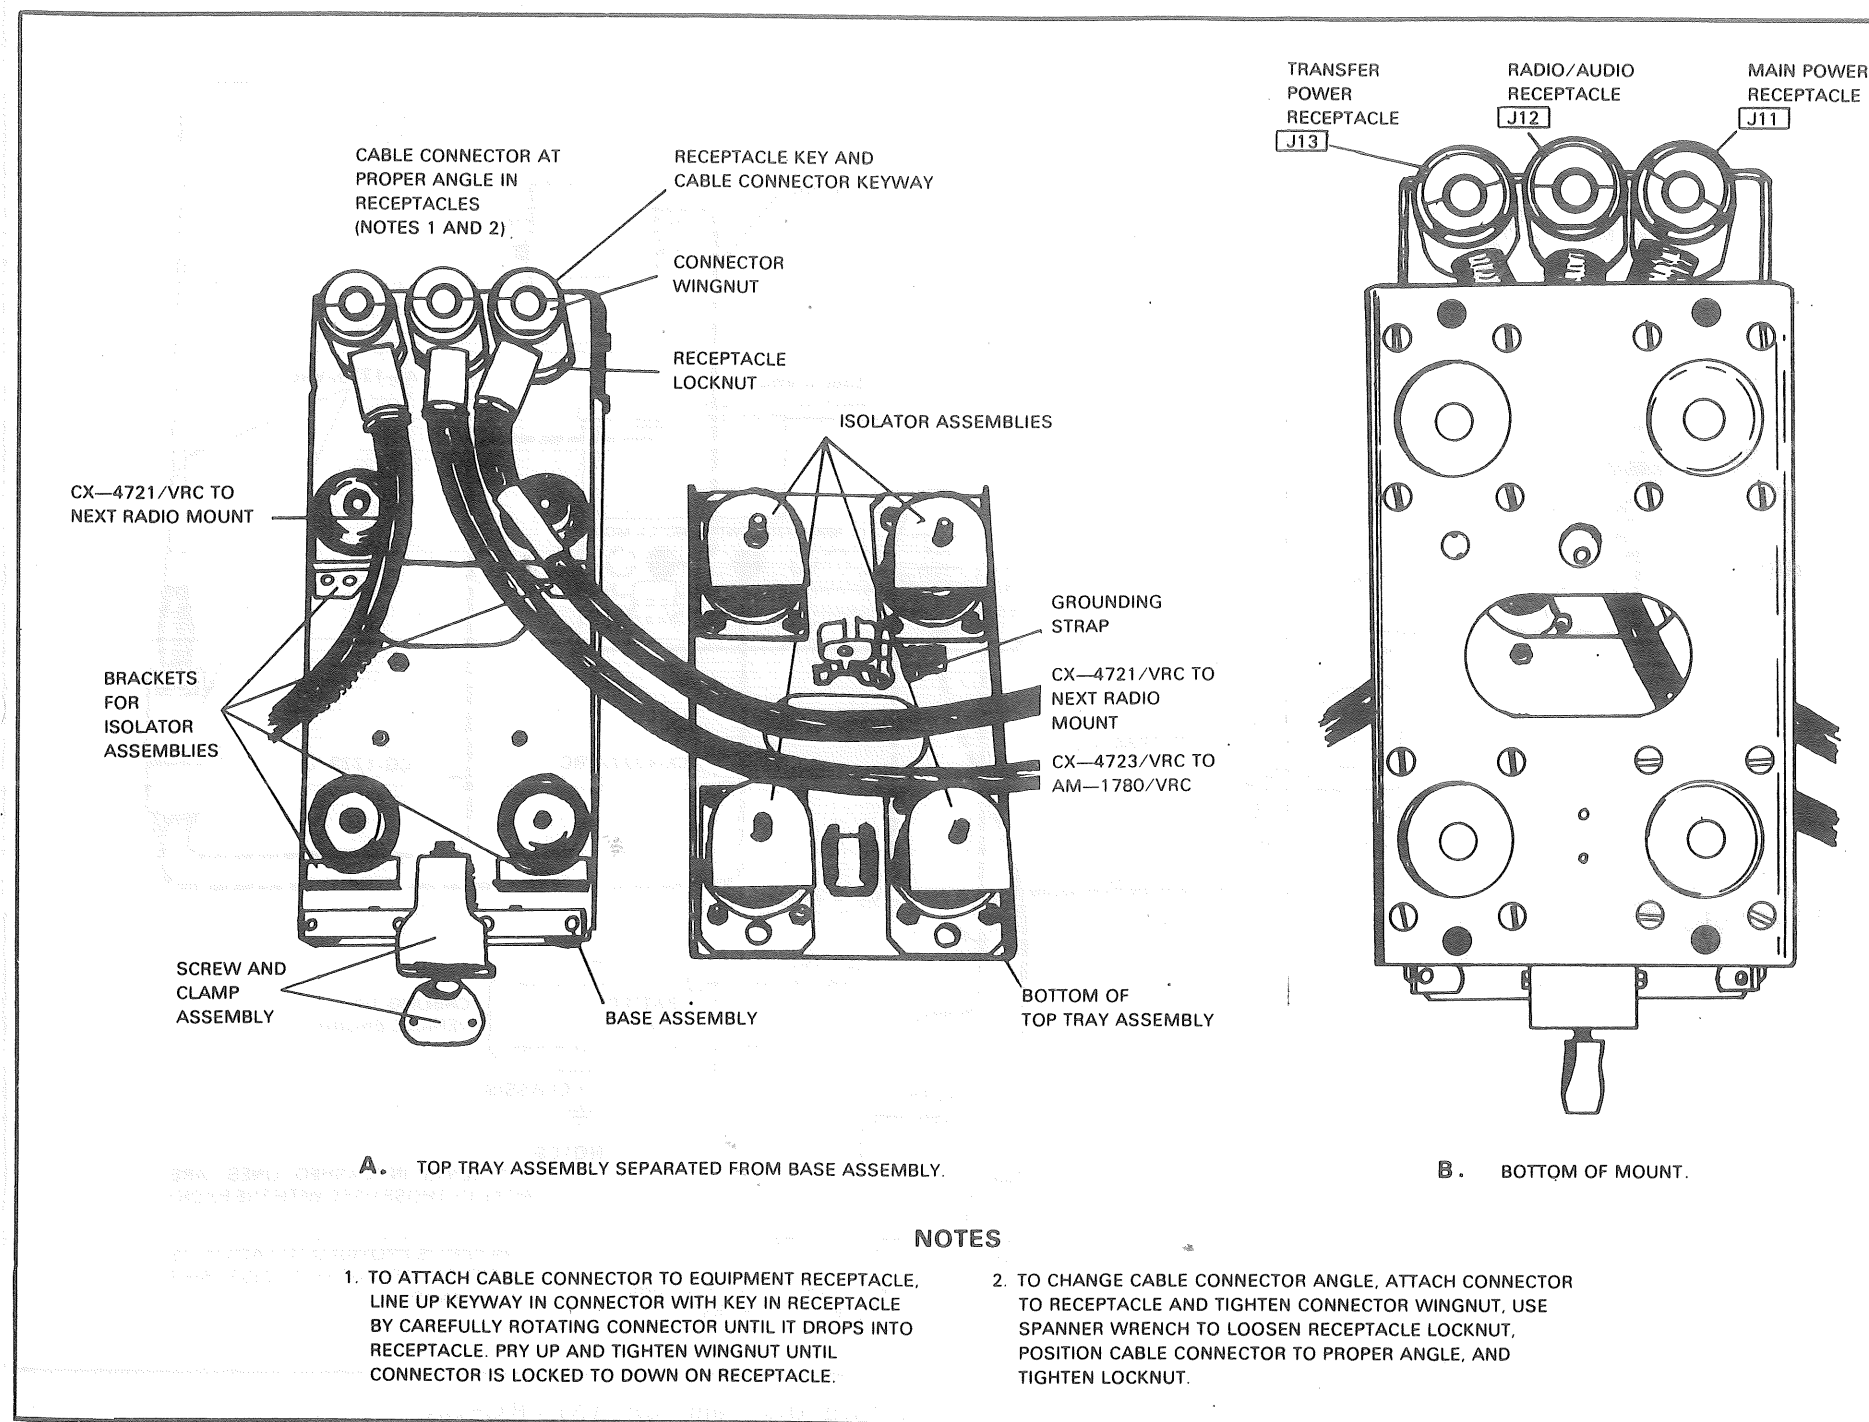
Mounting MT-1898/VRC disassembled and with typical cables attached to receptacles.
